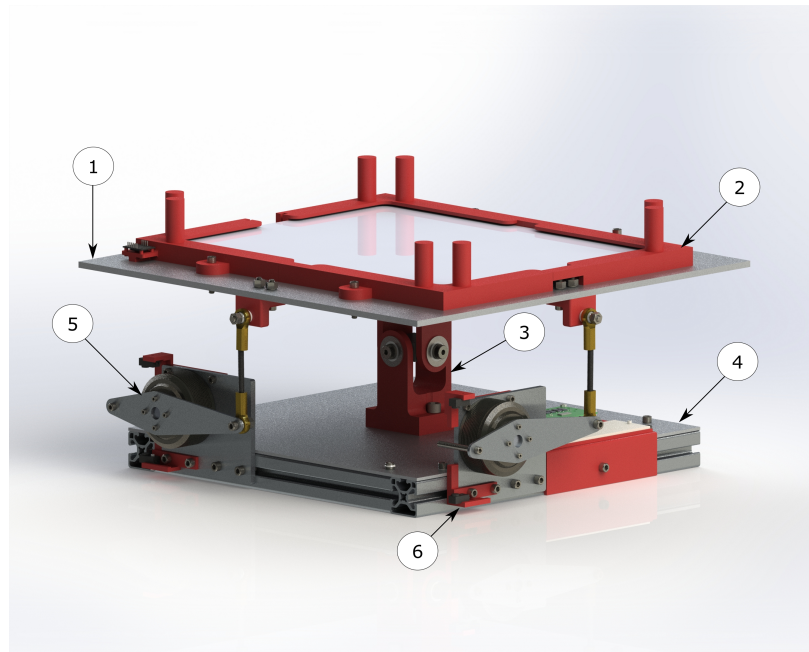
Render of Ball-and-Plate Platform SolidWorks Assembly
